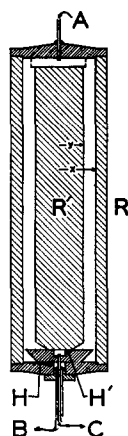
Drawing of tubular rotor used for centrifuging liquids.
